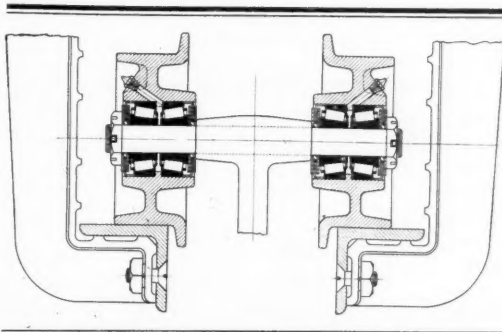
Typical Layout for Overhead Conveyor Wheels, Showing How Escape of Lubricant Is Prevented
